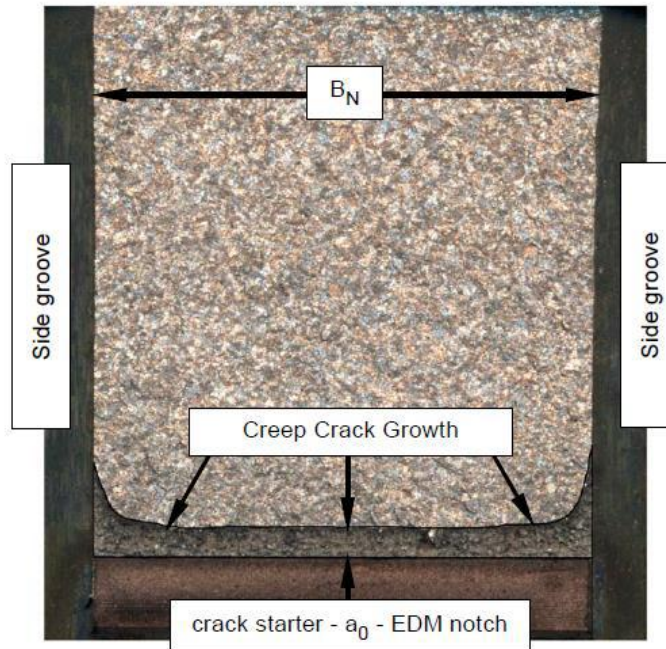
Crack front on a side grooved C(T) specimen [52].
